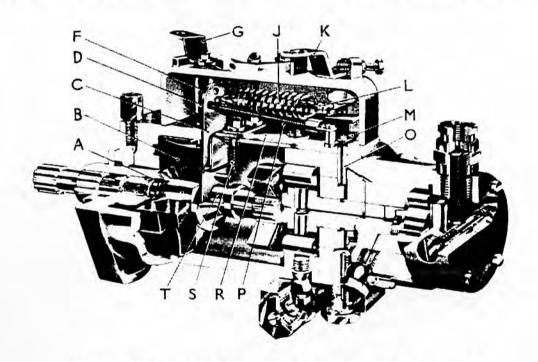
SECTIONAL VIEW OF FUEL PUMP AND MECHANICAL GOVERNOR
